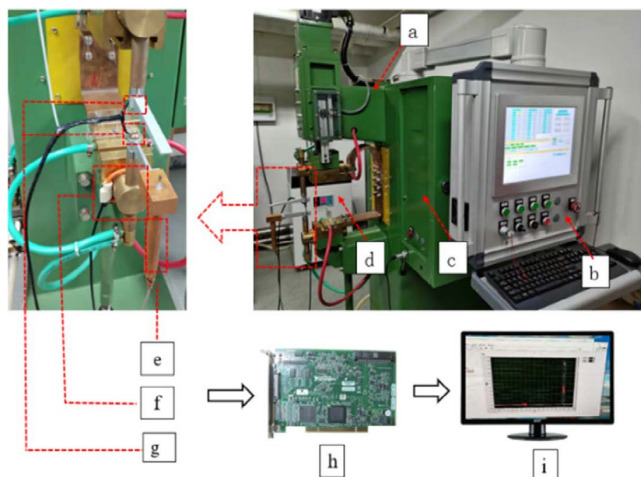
Synchronous data collection and processing facility. (a) welding machine, (b) human-computer interaction interface, (c) welding controller, (d) water cooler equipment, (e) LVDT sensor, (f) Rogowski current transducer, (g) wire for voltage measurement, (h) data acquisition card, (i) data collection and processing program (Online version in color.)
